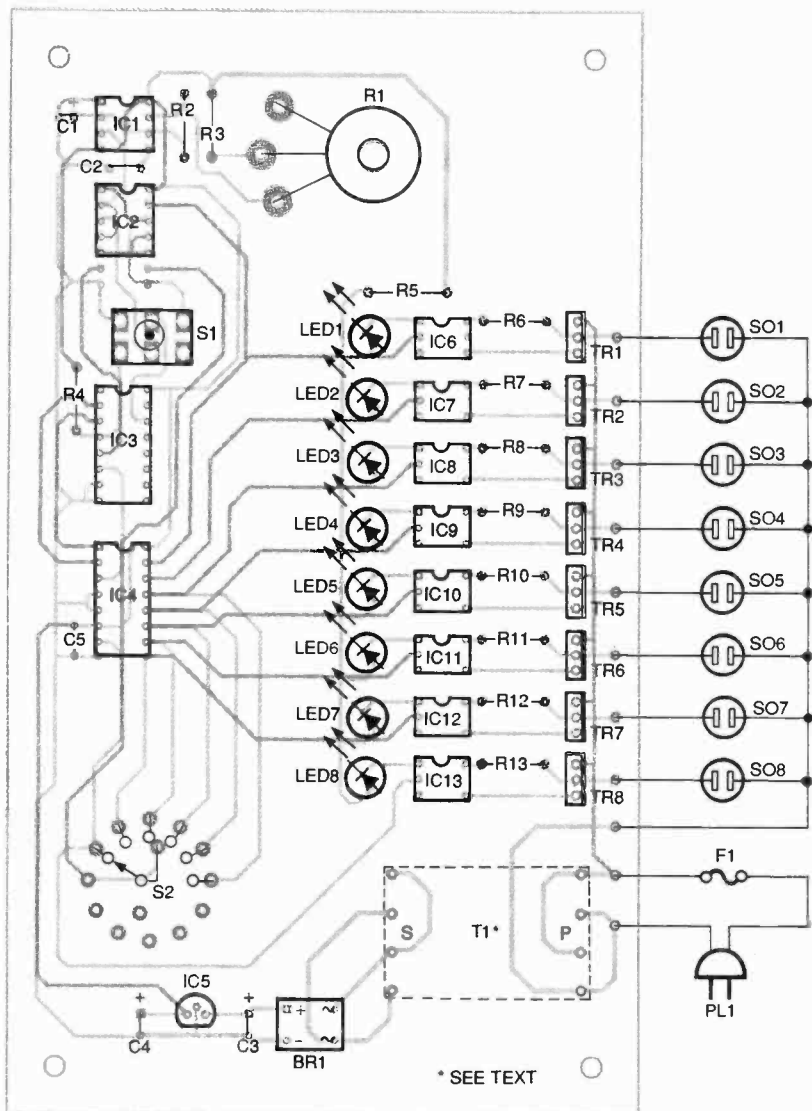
Use this parts-placement diagram as a guide when building the Light Animator. Note that transformer T1 mounts onto the solder side of the board.
